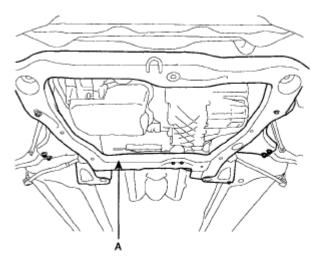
Identifying Front Exhaust Pipe Courtesy of HYUNDAI MOTOR CO.
